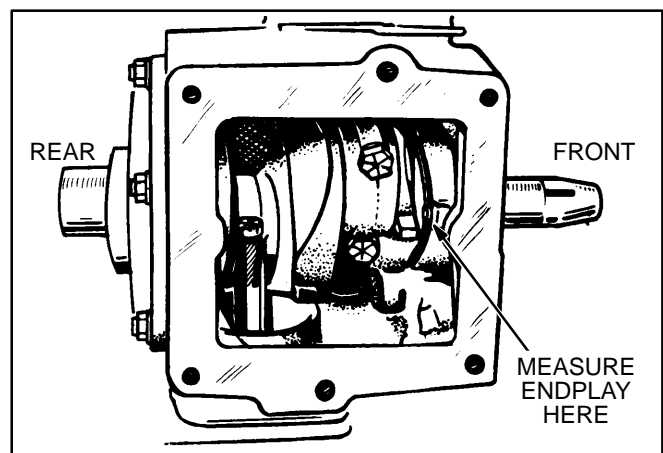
CHECKING CRANKSHAFT ENDPLAY
